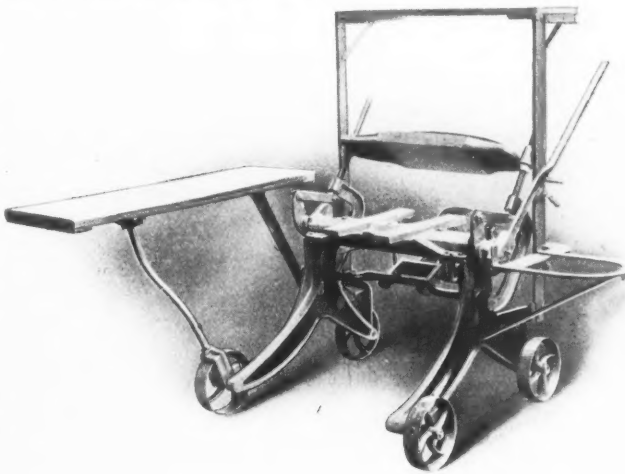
A Machine of the Squeezer Type, adapted to the Keep Match-plate Process
